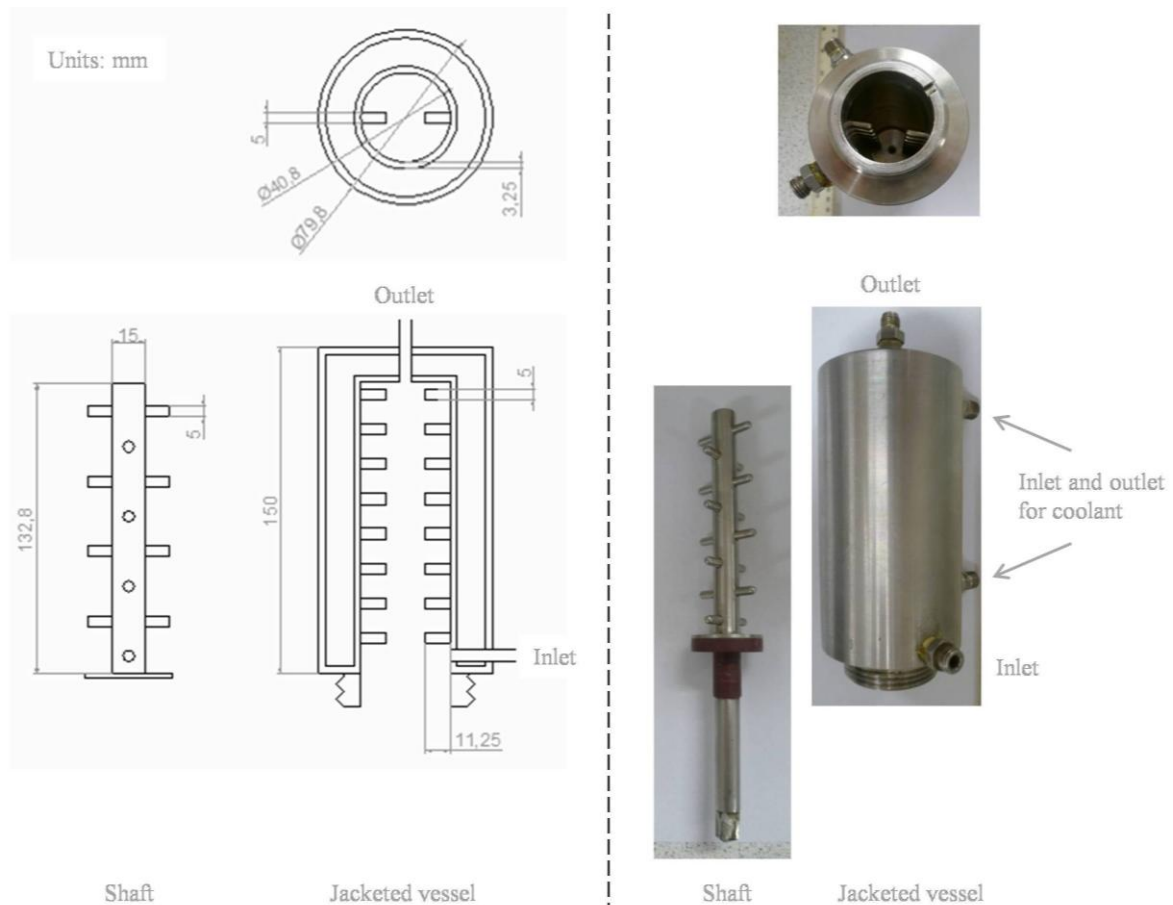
Drawings (left) and photographs (right) of the pin-stirrer shaft and jacketed vessel (once disassembled).
